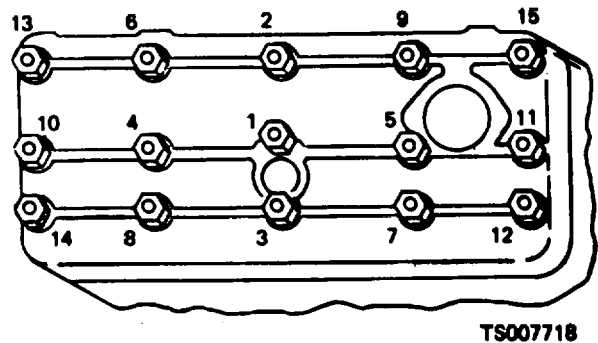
Cylinder Head Bolt Tightening Sequence.
